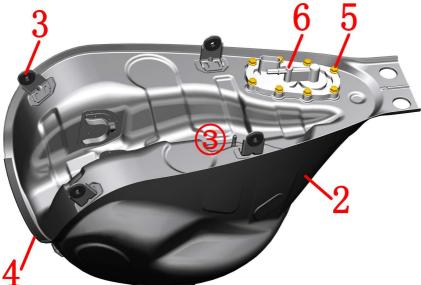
Tank liner component		Tank liner component (Big fuel tank)	CHK
